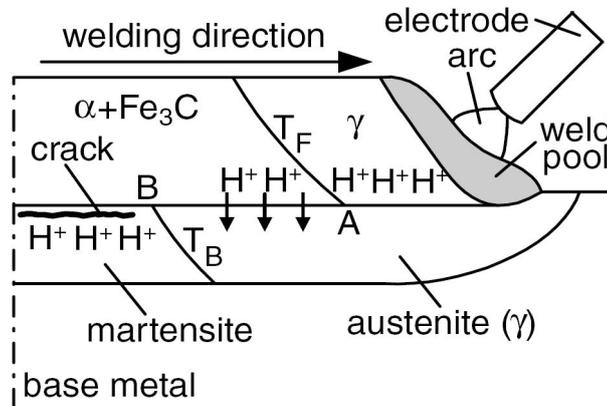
Diffusion of hydrogen from weld metal to HAZ during welding [33].
